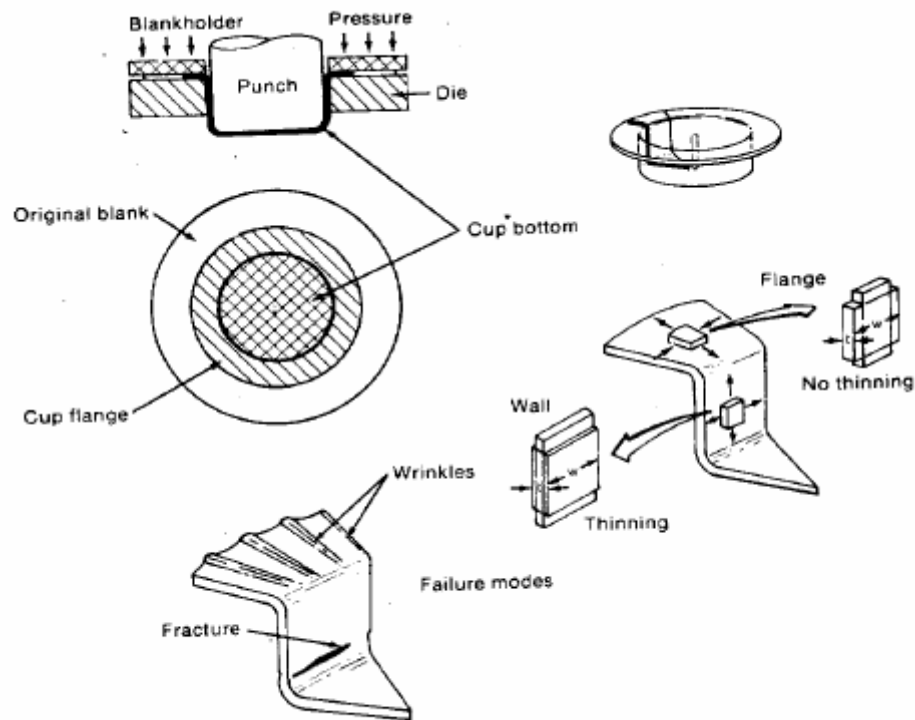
Forming defects associated with deep drawing [14].
